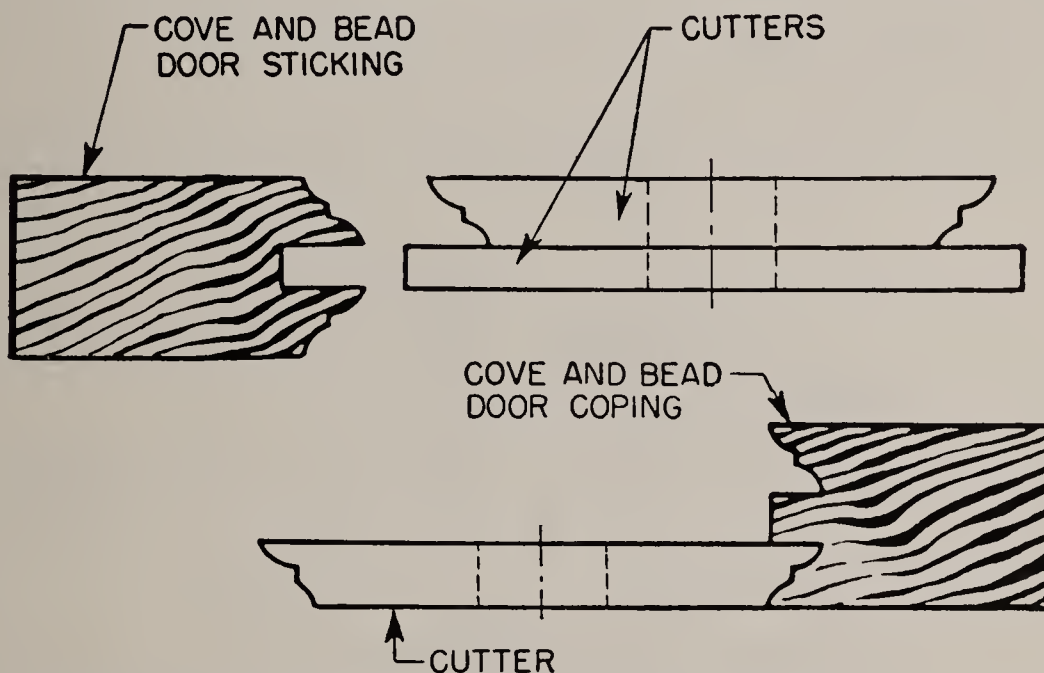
Cutter types used for shaping typical cove and bead moldings and copings.
